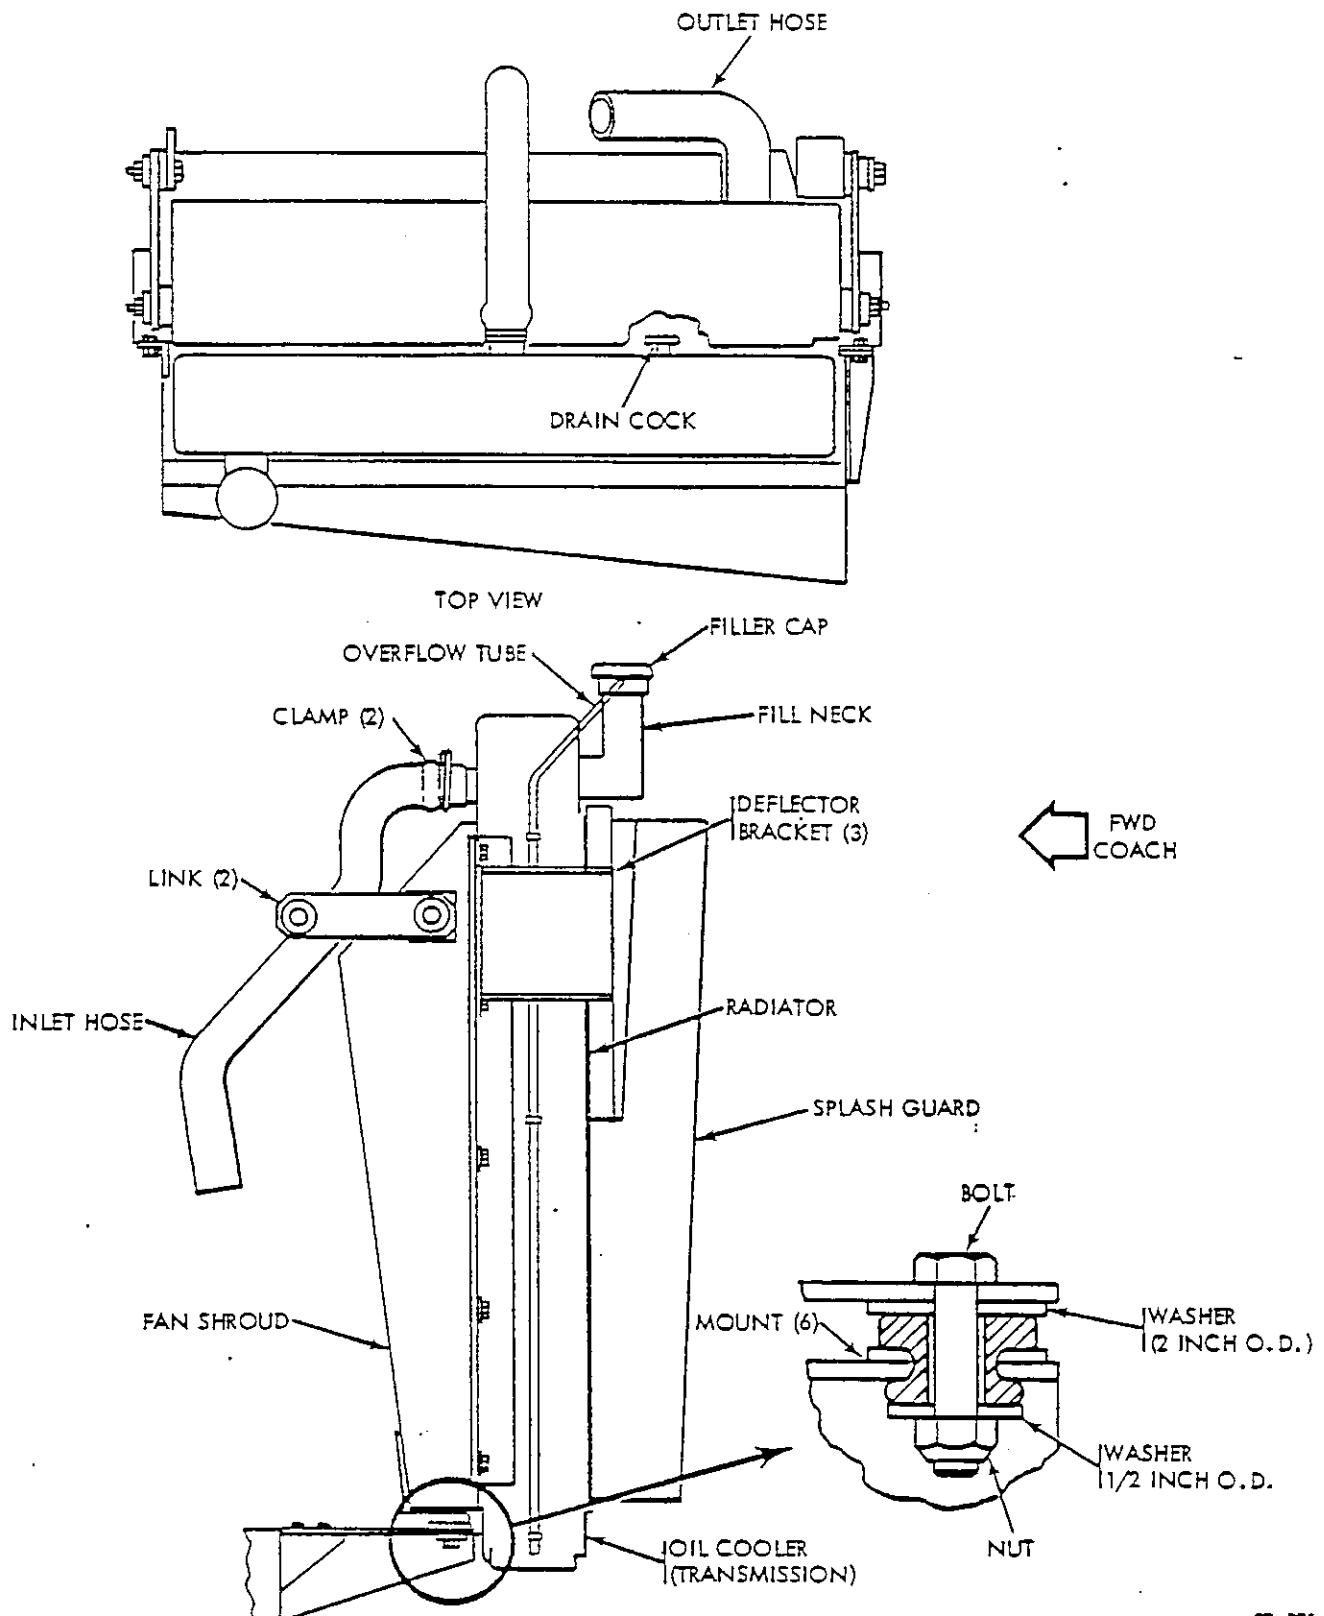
Radiator and Transmission Oil Cooler Assembly
